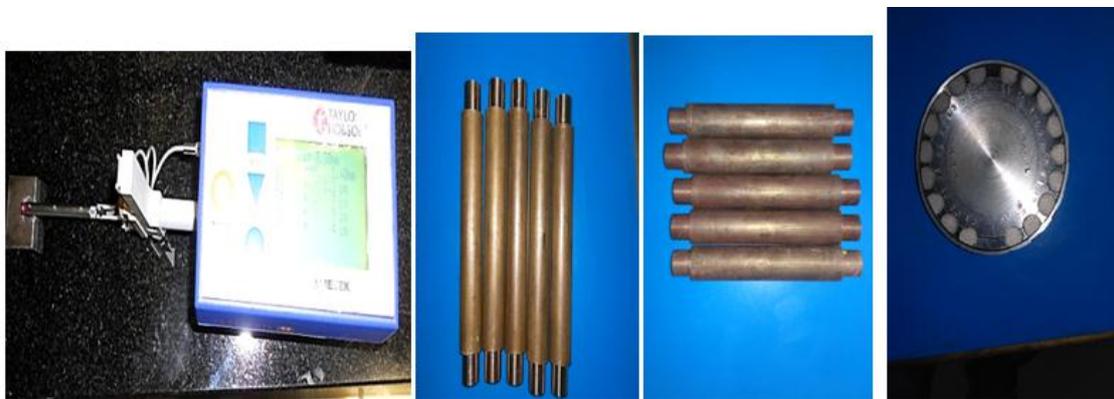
(a) Profilometer (b) without heat treated and heat treated copper tool after machining (c) Workpiece(EN 8) after machining
